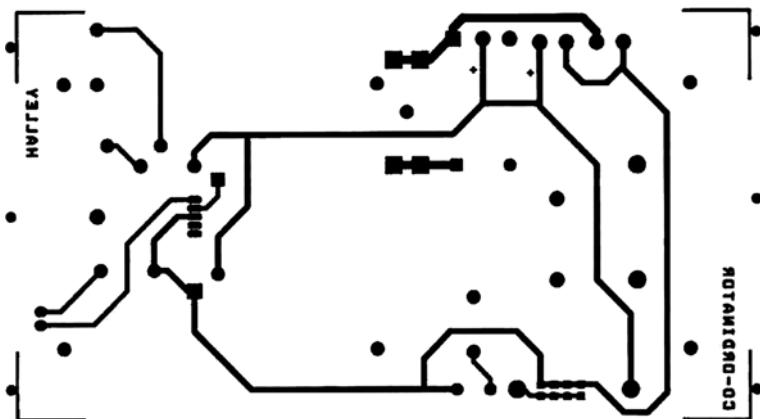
PCB bottom layer of power supply part of coordinator
